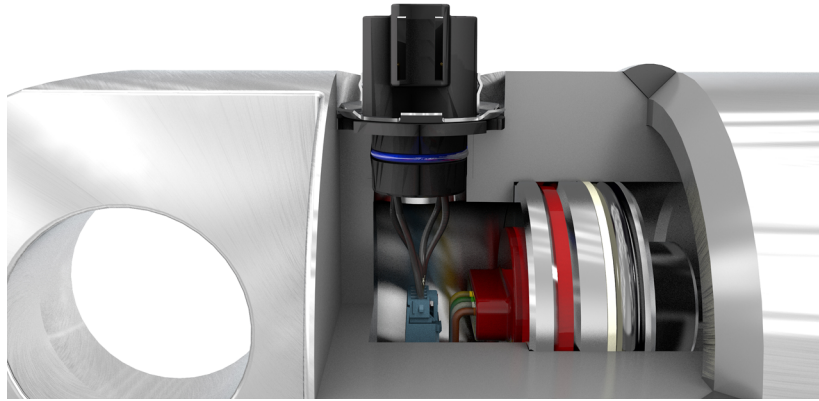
Mounting sensor with DT connector – 1-piece version, part 4
